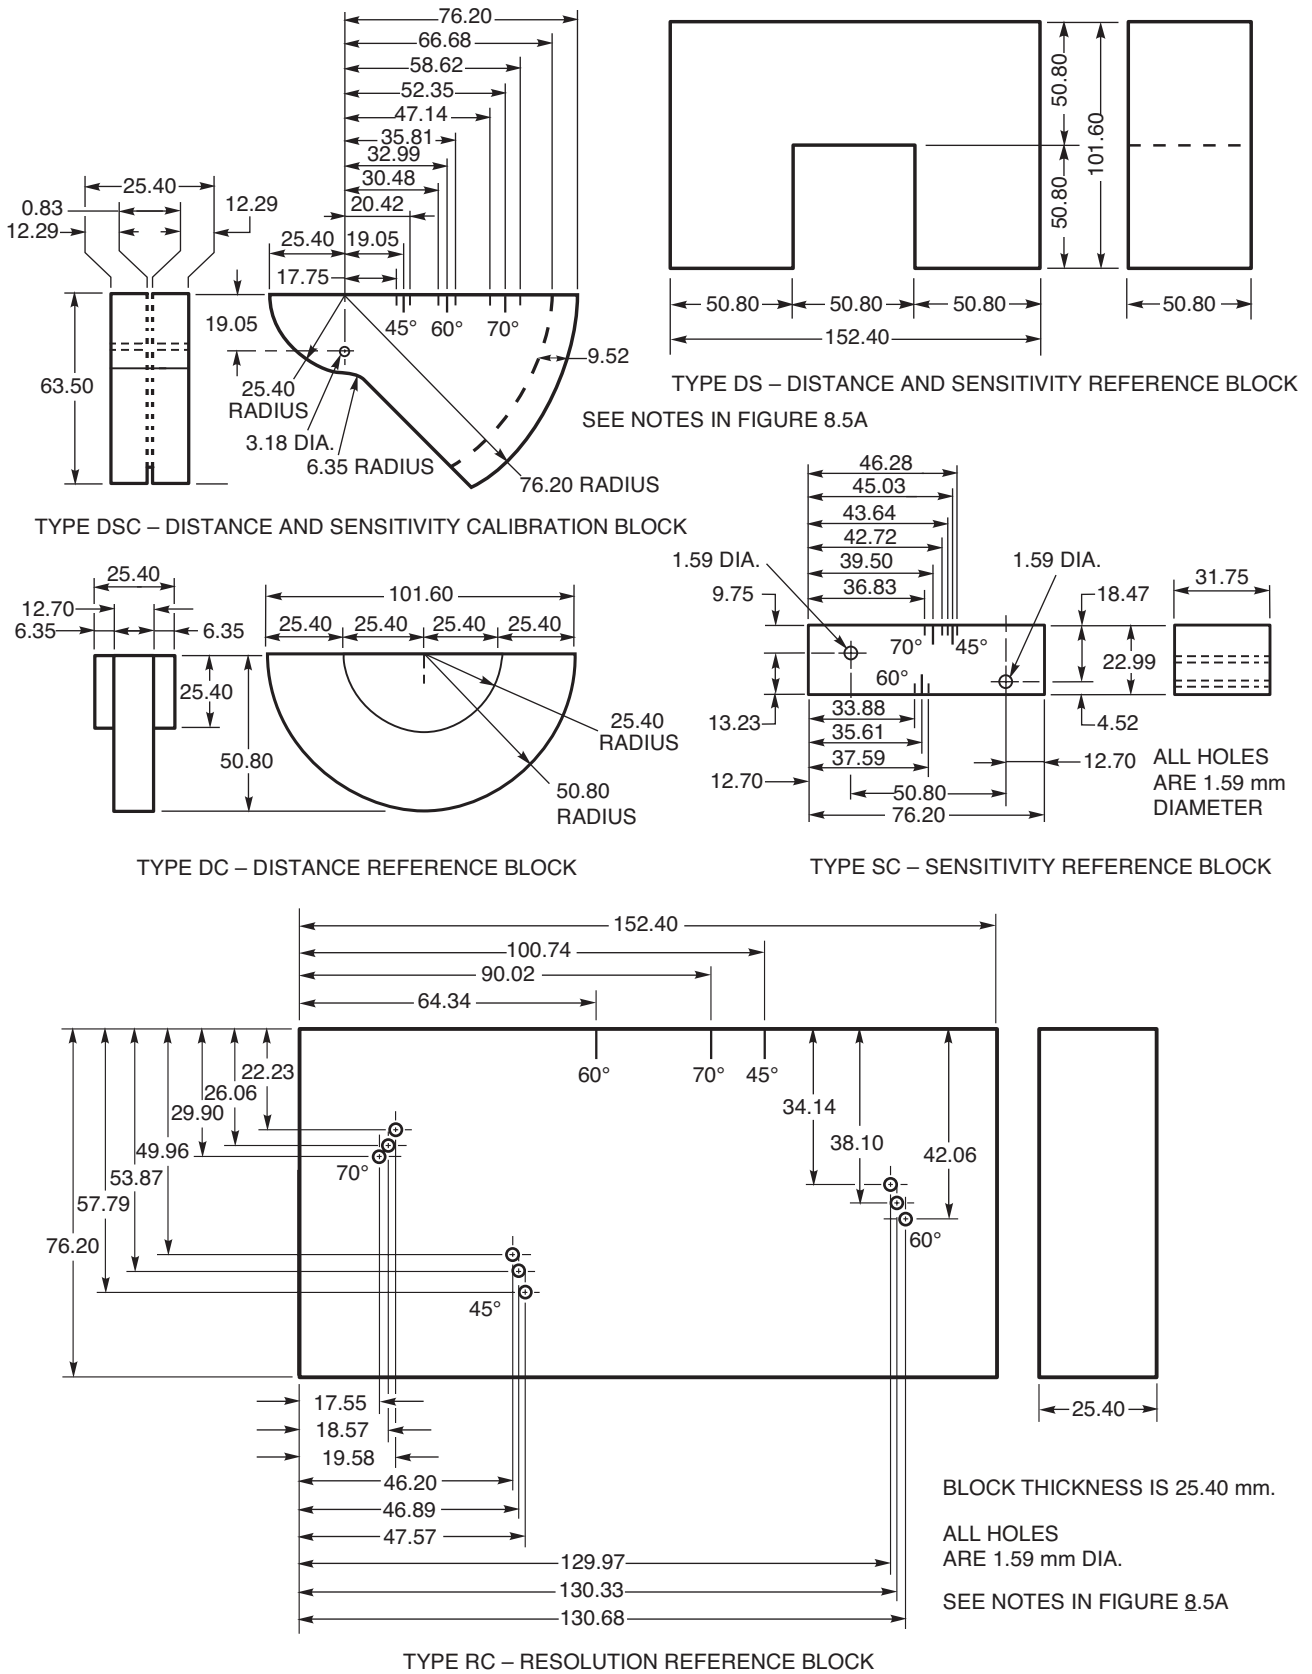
B—Other Approved UT Reference Blocks (see 8.16.1) [Dimensions in Millimeters]
